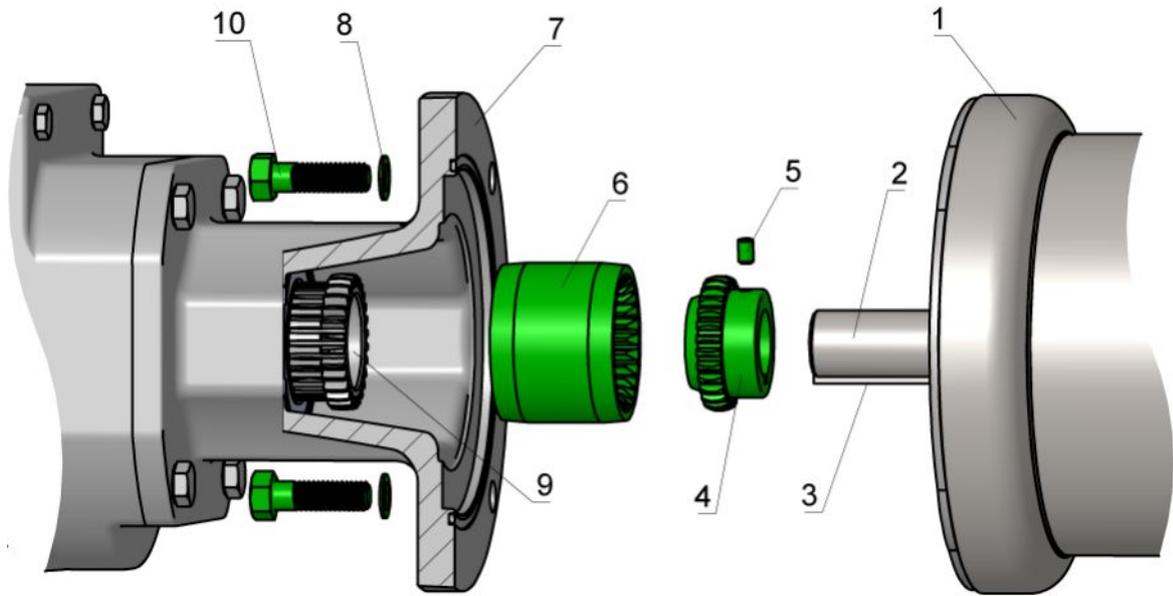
Installation steps – CLM cLEAN motor on KSS series gearboxes
